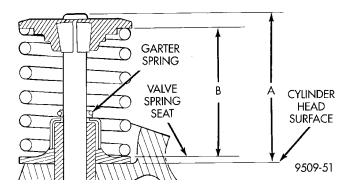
Checking Spring Installed Height and Valve Tip Height Dimensions
